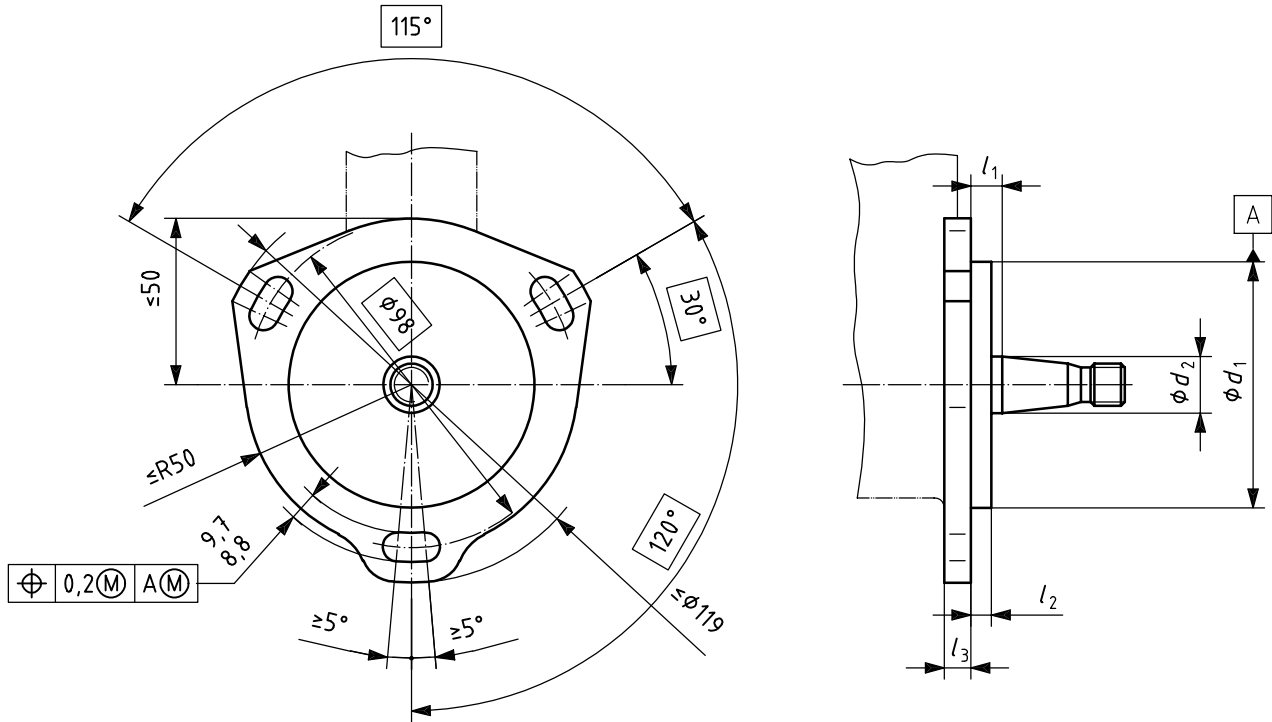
Fuel injection pumps — Type 5 end-mounting flange
